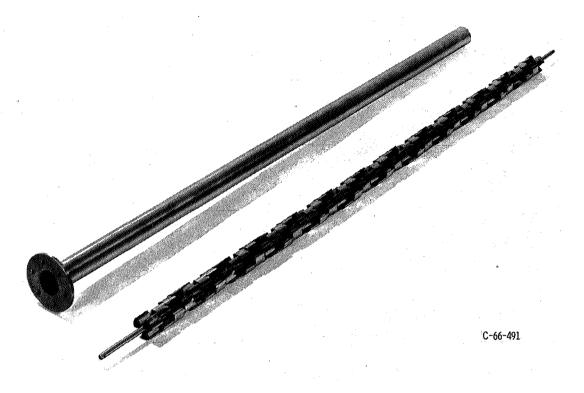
Fins welded to 1/4-inch (0.64 cm) tube prior to insertion into flow tube.
